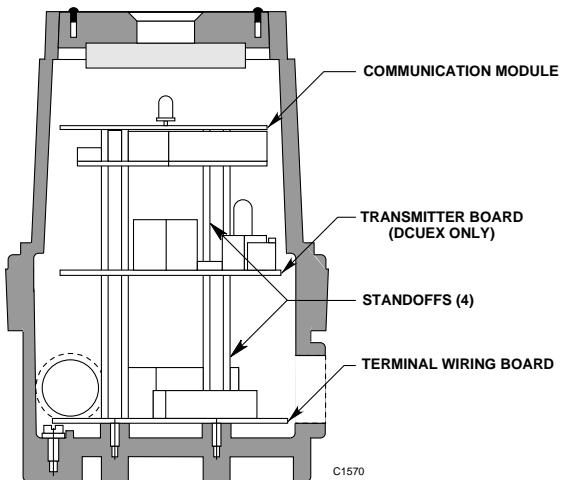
Printed Circuit Boards in Combustible Gas DCUEX
